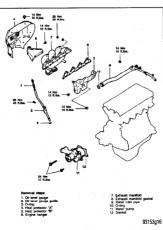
Exhaust manifold exploded view 1.6L and 2.0L (non-turbo) DOHC engine
